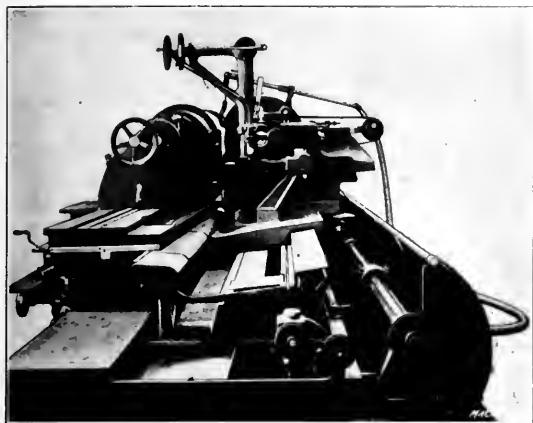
Right-hand End of Roll Grinding Machine showing Driving Shaft
